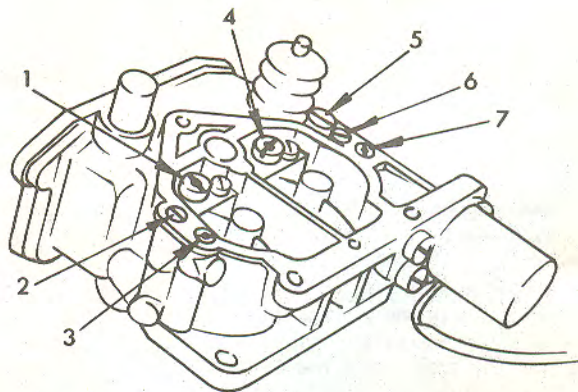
View of the carburettor body with the cover removed to show the location of the various jets.
